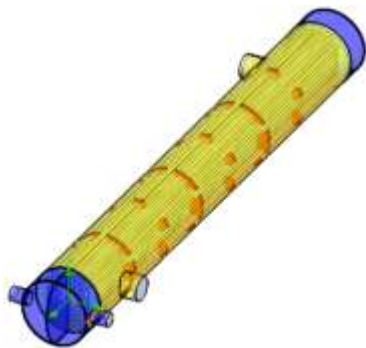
Assembly of Heat Exchanger with Flower Baffle Plates
